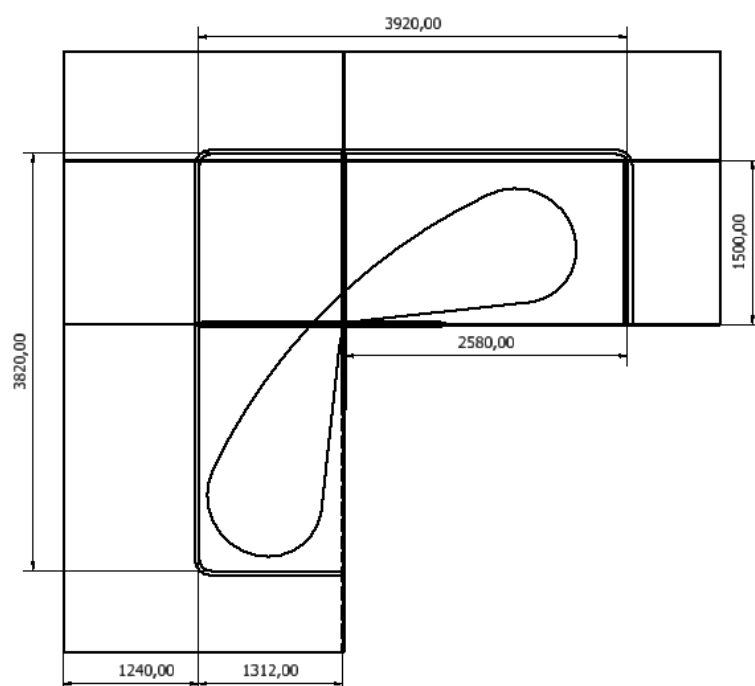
Drawing with dimensions for cut-out design for buckling analysis.
